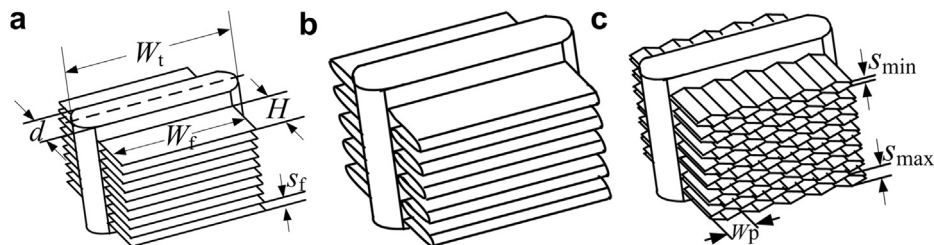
Geometric diagram of three fin-and-tubes, (a) shape A; (b) shape B; (c) shape C.
